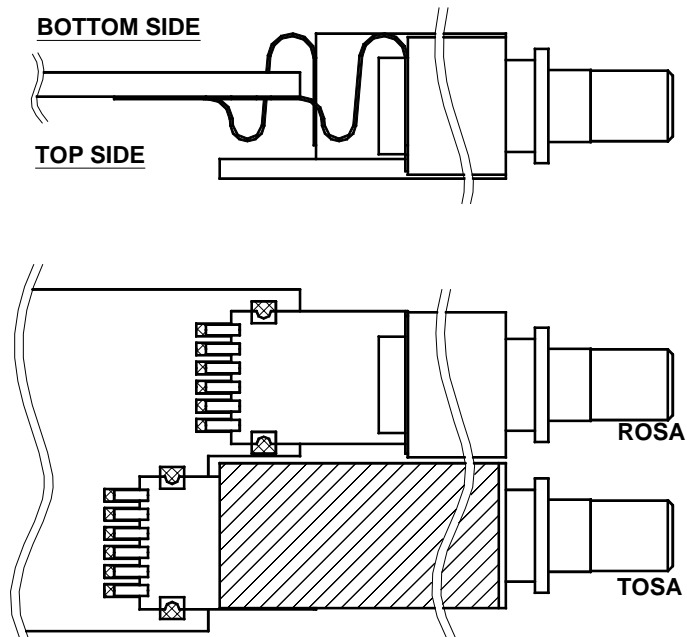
Recommended pattern layout for the PCB in a pluggable module
